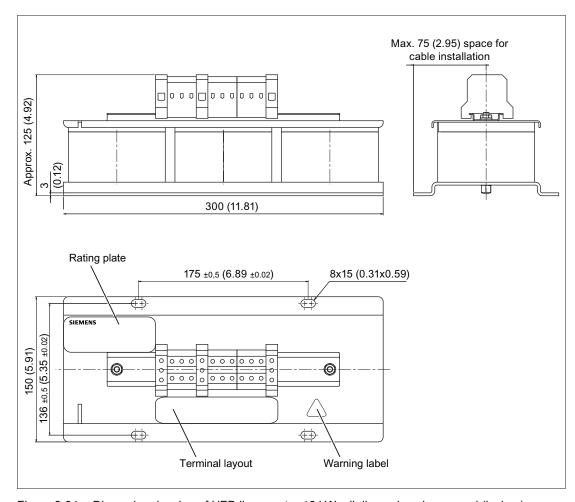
Dimension drawing of HFD line reactor 16 kW, all dimensions in mm and (inches)
